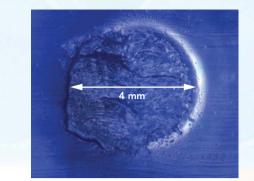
Material failure surface at interface of 3 mm diameter PC spot weld.
